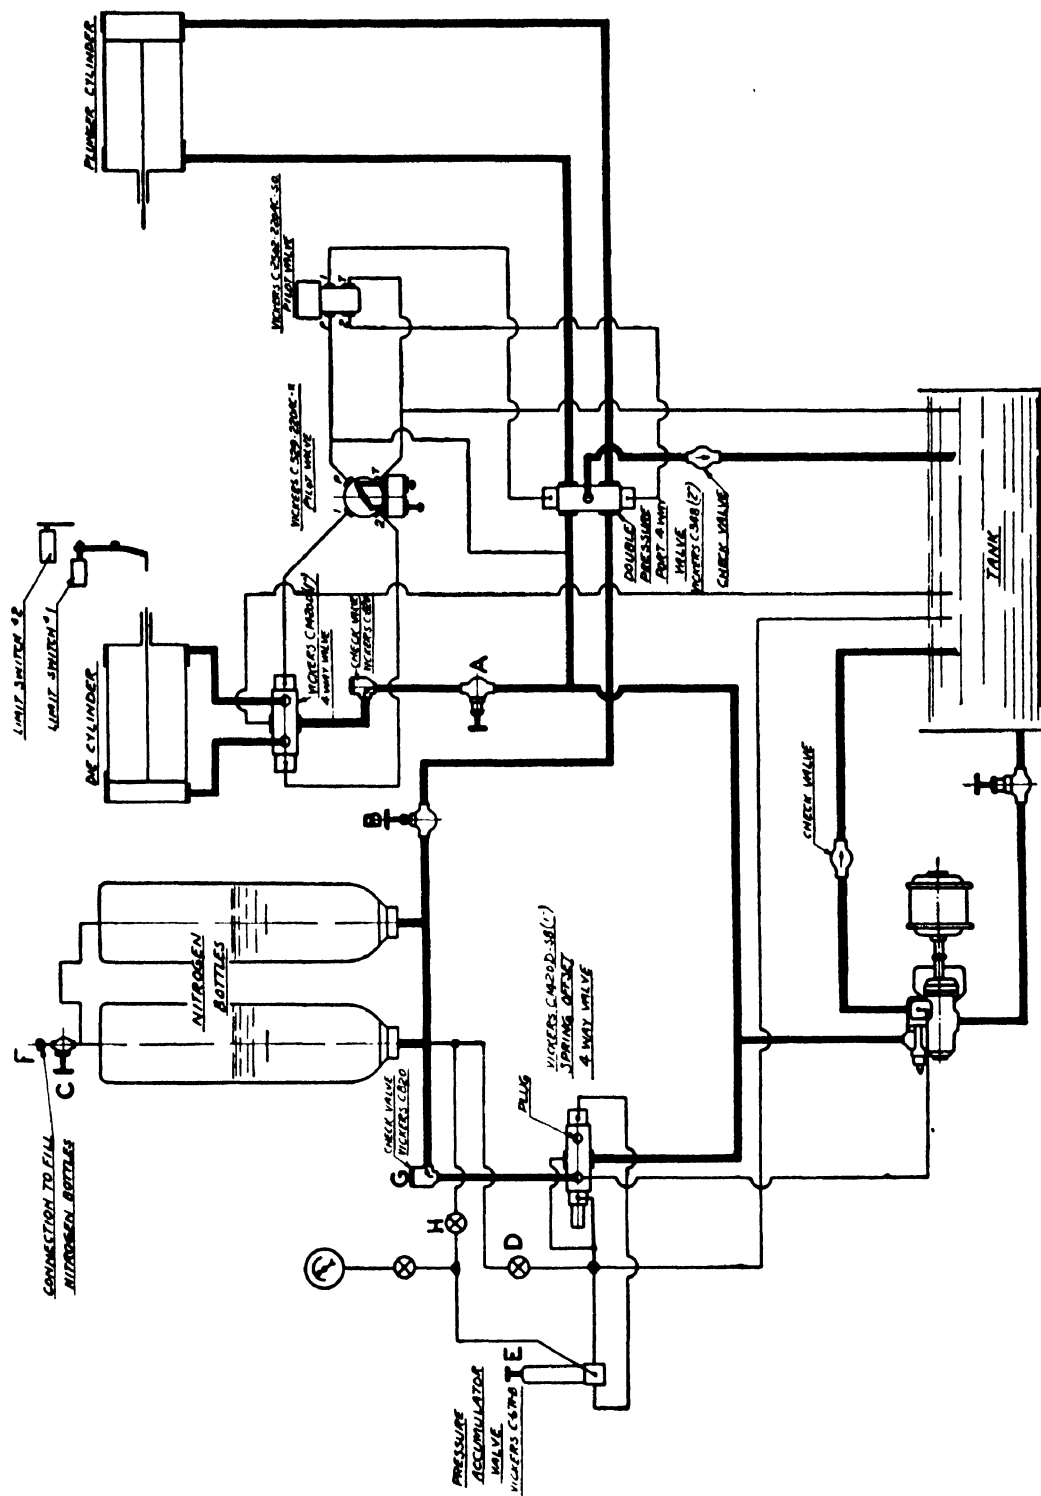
Hydraulic diagram of No. 1 1/2 die-casting machine. (The Reed Prentice Corp., Worcester, Mass.)
